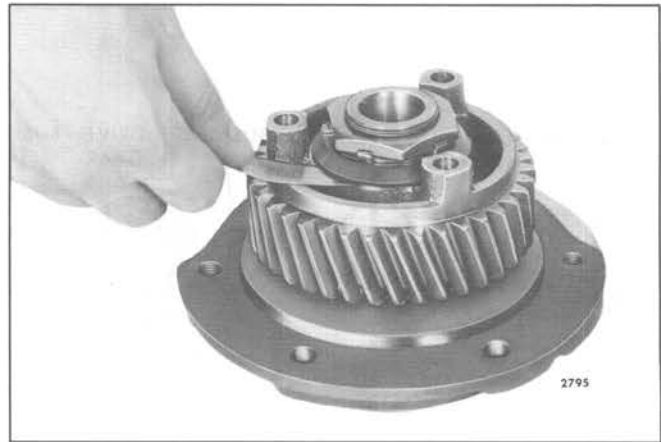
Checking Clearance Between Blower Drive Gear Support Thrust Washer and Thrust Bearing
